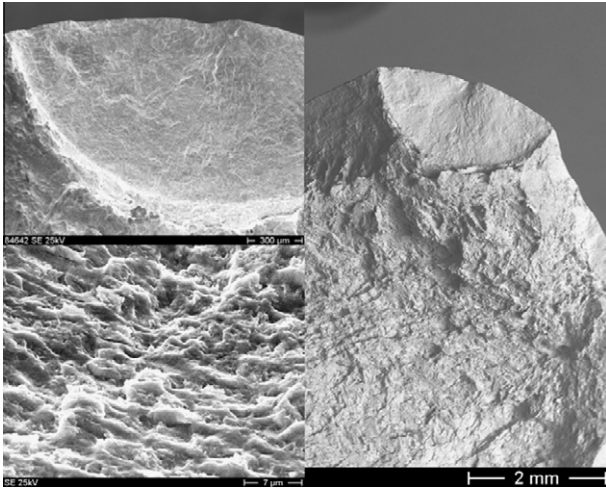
Fracture surface of specimen P12B tested under LCF/HCF loading. The fracture surface is flat (right and upper left picture) and fatigue striations are visible (lower left picture), which stem from 1.1 mm below the specimen surface and have a spacing of approximately 3 μm .
